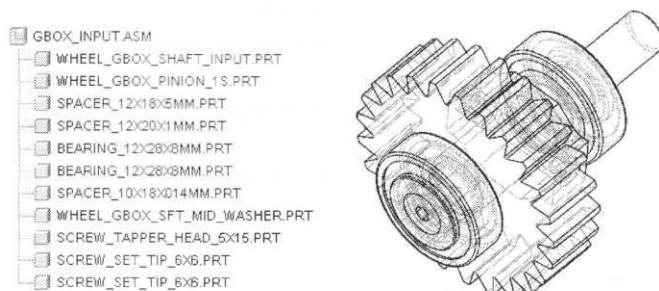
Input Gear Assembly in *Pro/ENGINEER
